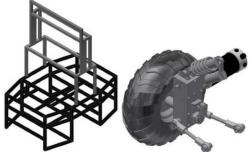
2017 Georgia Institute of Technology 1"x1" square steel tubing using MIG welding and 1"x1" square aluminum tubing IGVC vehicle frame, and integrated motorsuspension system.⁷
